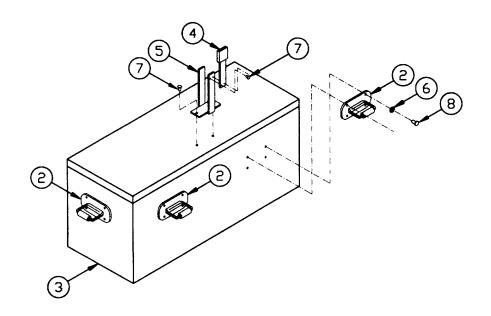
HANDLE ASSEMBLY, BOTTOM
